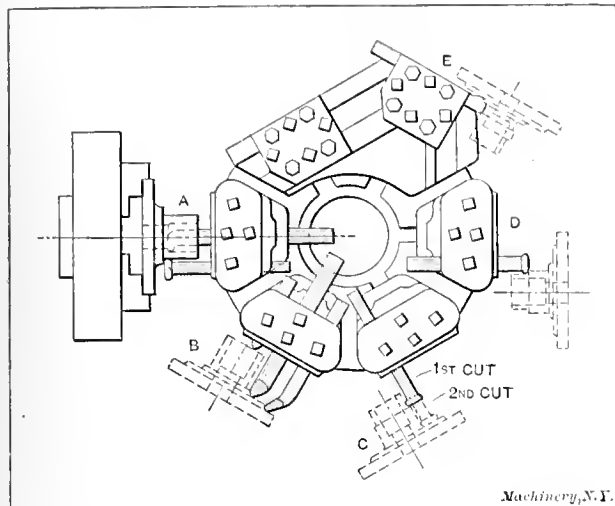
Lay-out of Tools on the Flat Turret Lathe for the Operation shown in Fig. 6
